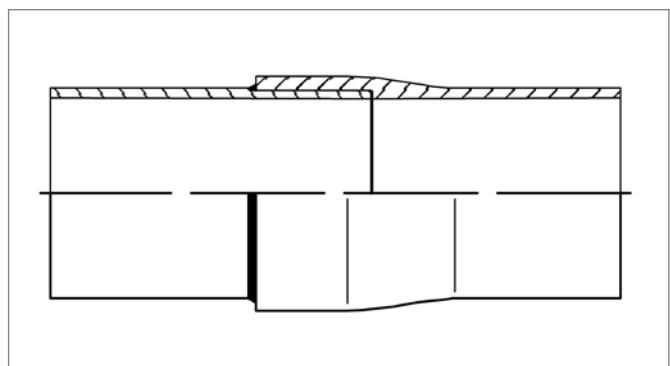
b. Conical-Cylindrical adhesive bonded joint
